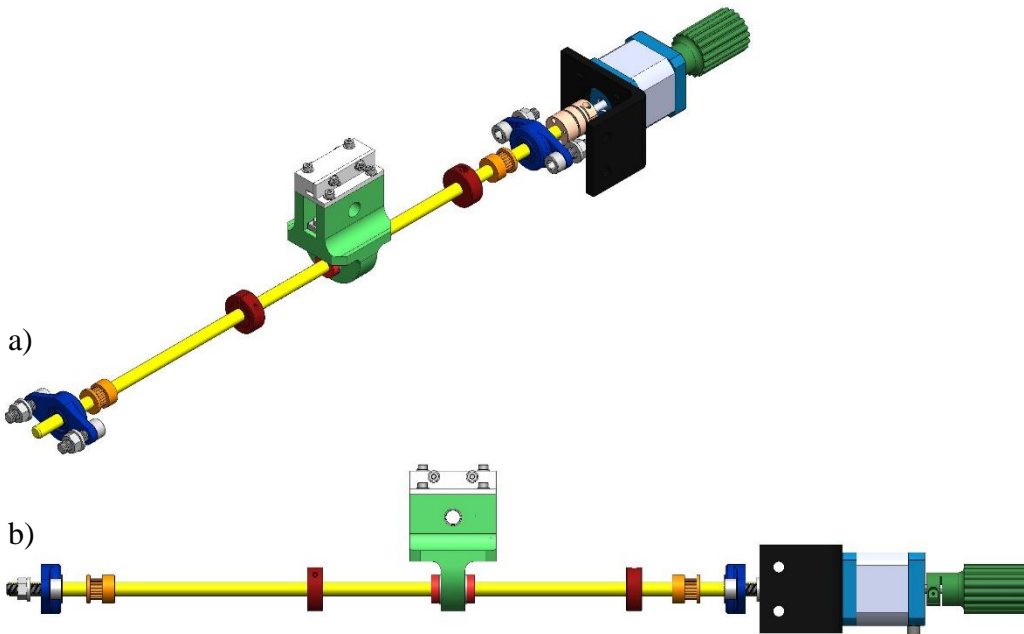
Mk2 Linear Motion Assembly¹¹
